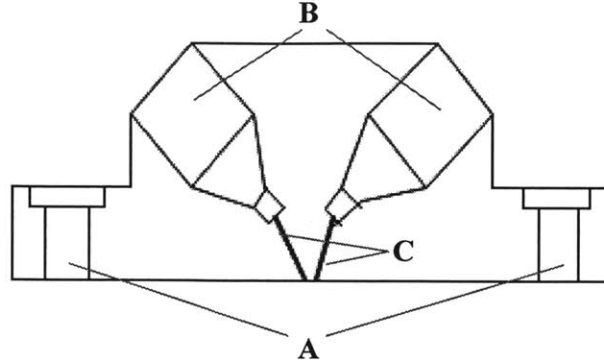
Sketch of 212 stator showing: A. Vertical holes along the circumference of the part; B. Conical holes; C. Bottom holes
